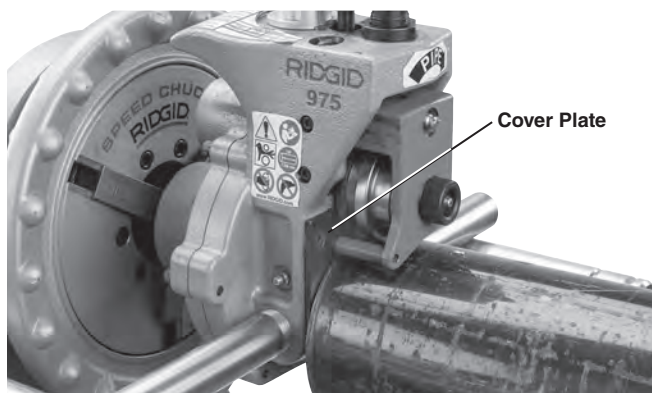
Placing Pipe Over Driveshaft and Flush To Cover Plate
